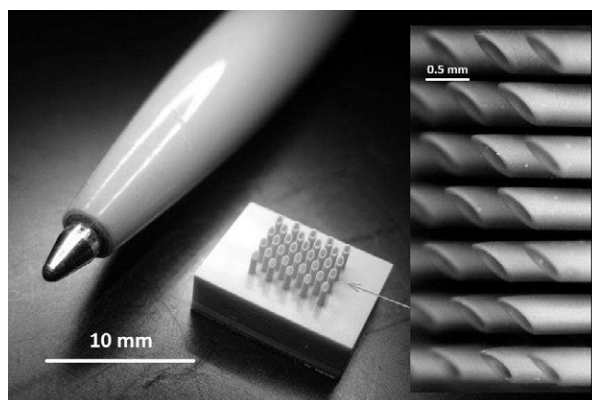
Prototype of a 32-nozzle print head for cell deposition with a pitch of 1.2 mm and inner/outer nozzle diameters of 320/500 µm, inset image showing side view of the nozzle array with tapered tips.
